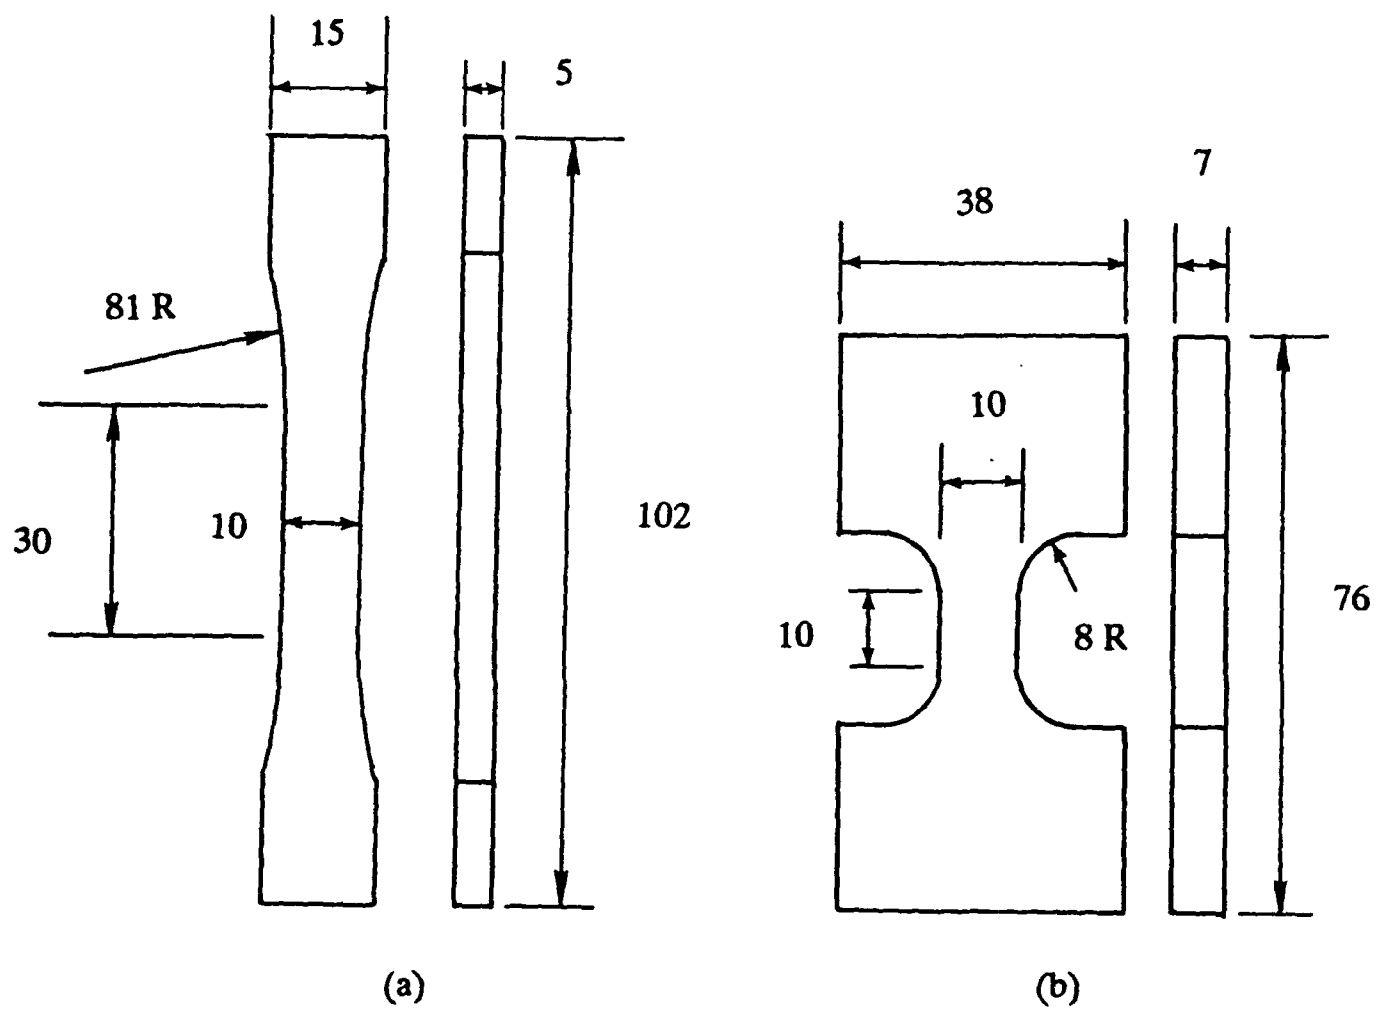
Specimen geometries for (a) fatigue at 276 MPa and (b) fatigue at 345 MPa. Dimensions in mm.
